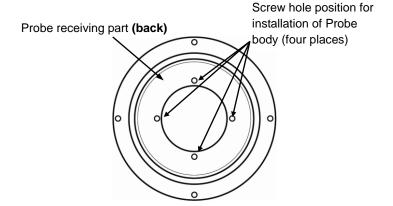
(c) Screw hole position for installation of Probe body on Probe receiving part
